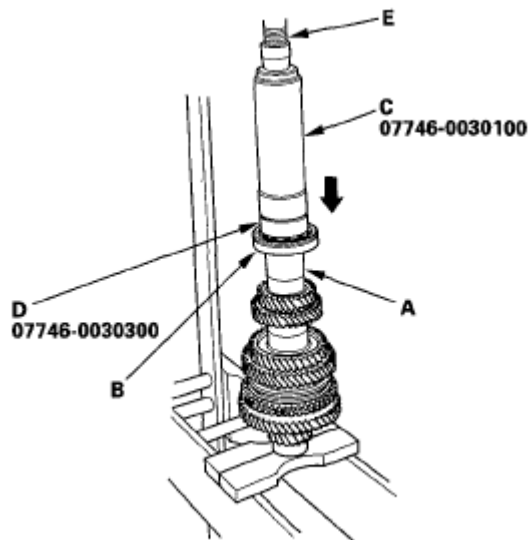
Installing Distance Collar, Shim And Ball Bearing
